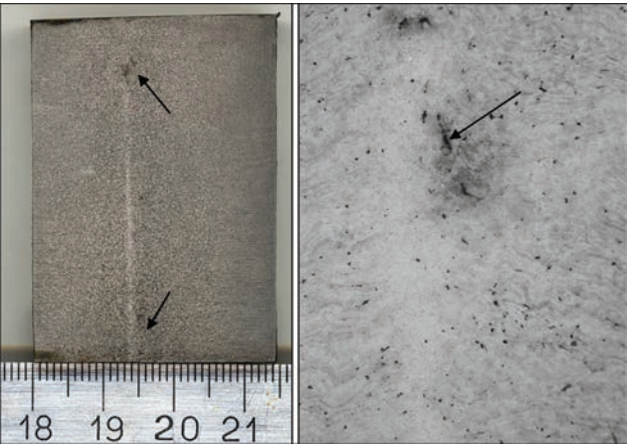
Microcracks in macrostructure (×25) of welded joints of rail steel 76F
